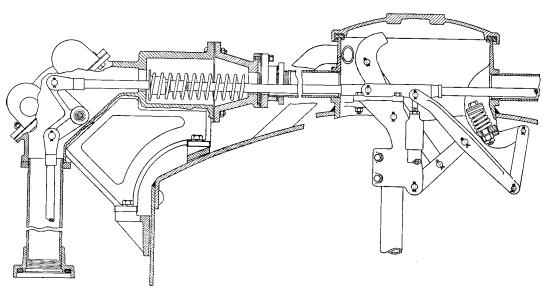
Main Assembly Details, Type G-2, 154,000 Volt Breakers
